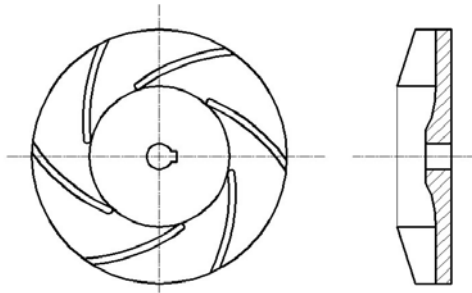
Blade-to-blade and meridional view of the centrifugal impeller
